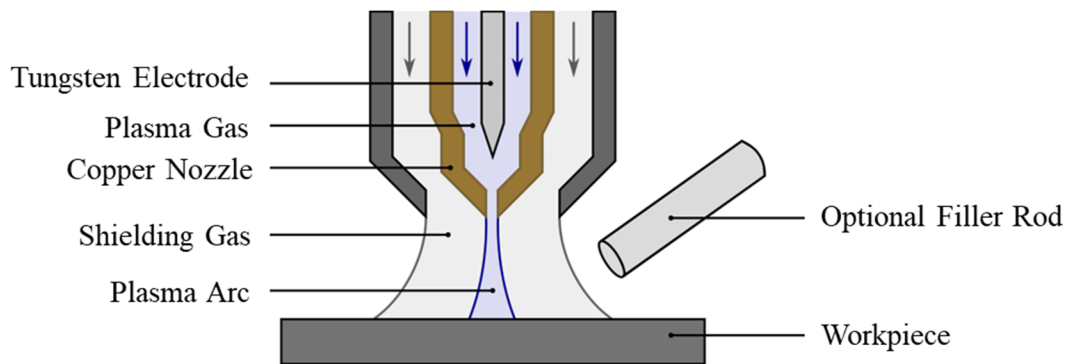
Sectional schematic view of a plasma arc welding torch
